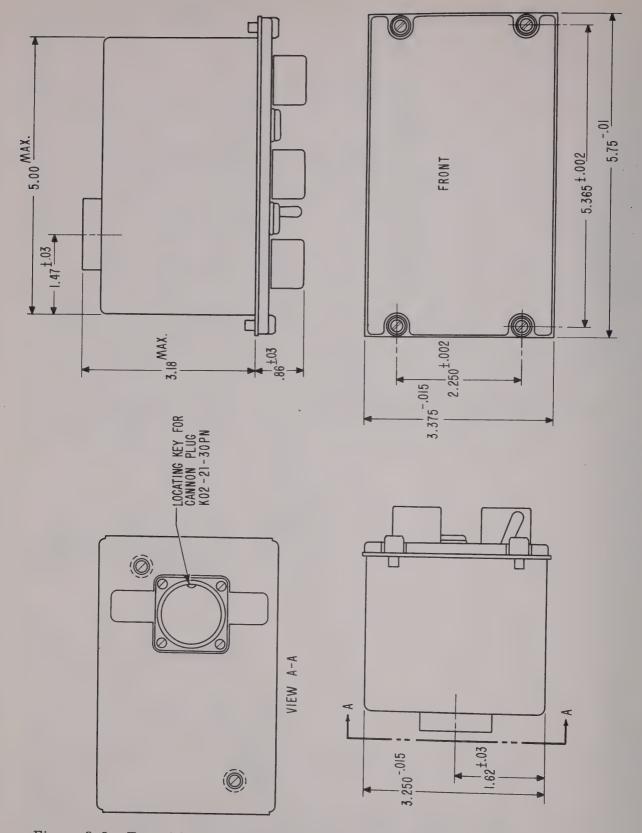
Type CON-1G, CON-1M Controls, Dimensional Outline Drawing
